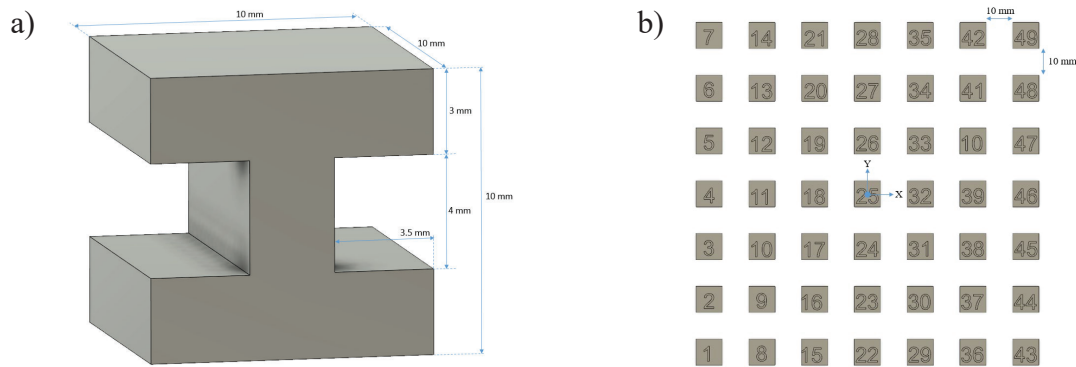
Dimensions of (a) SLS I-beam test part and (b) their arrangement within the build chamber
